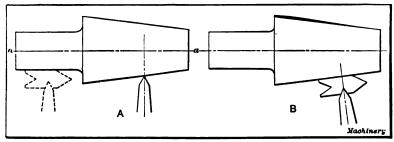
Correct and Incorrect Positions of Tool for Taper Thread Cutting
